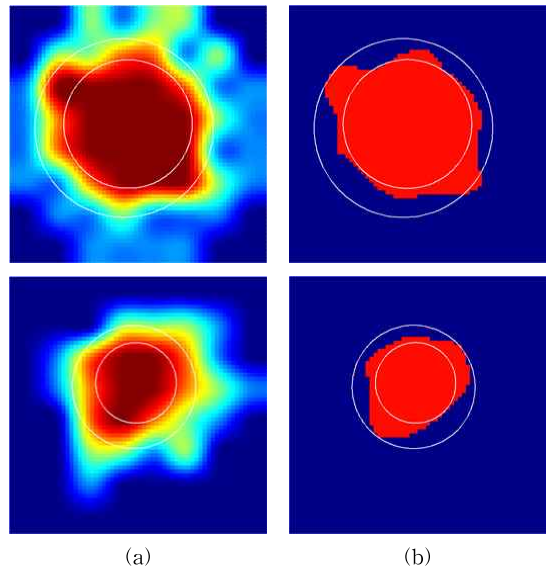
(a) C scan color images and (b) welding images found to be "very good."
